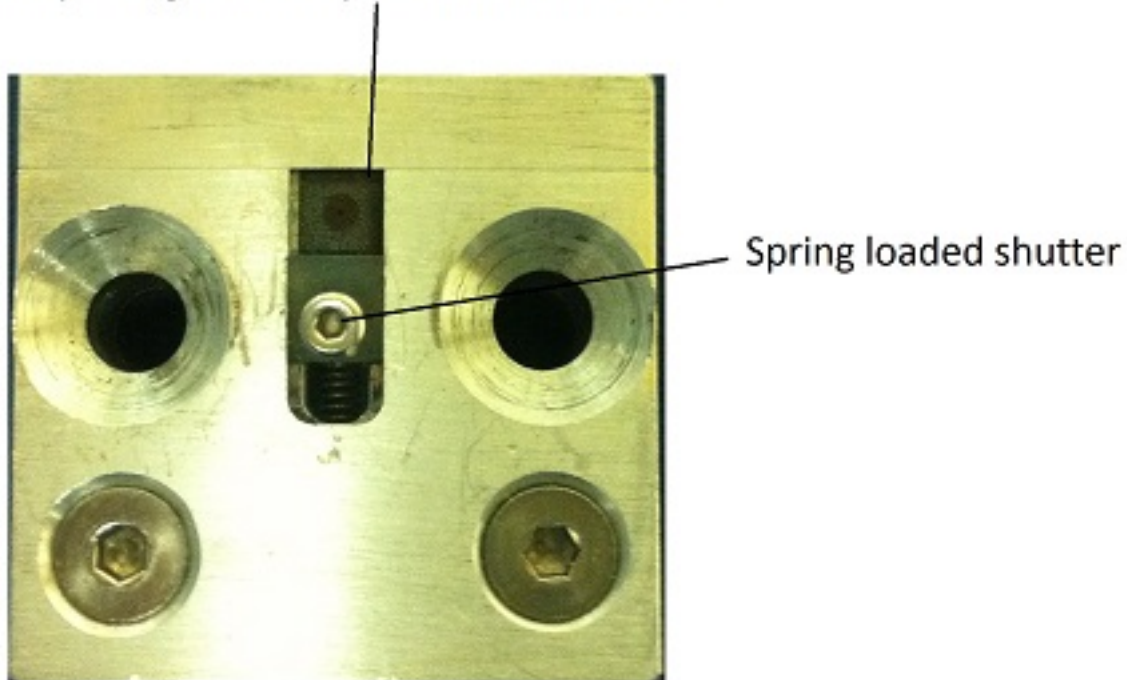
Sample holder used in the laser cutter to ensure holes aligned when milled from both sides.
